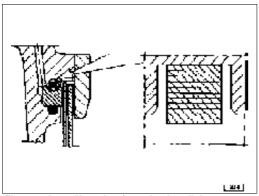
Installing the front brake disk pressure piston seal ring.
